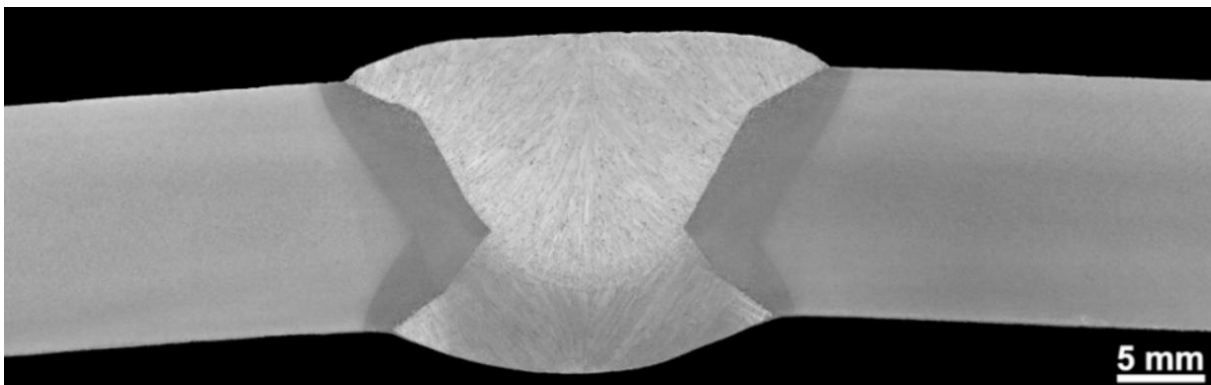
Macrograph of the structures present in the seam weld of the X60B steel pipe.
